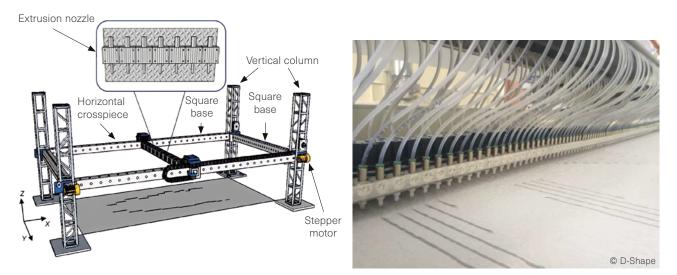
Powder fusion 3D printing process using a D-Shape printer (left) and a print head with multiple nozzles (right).
